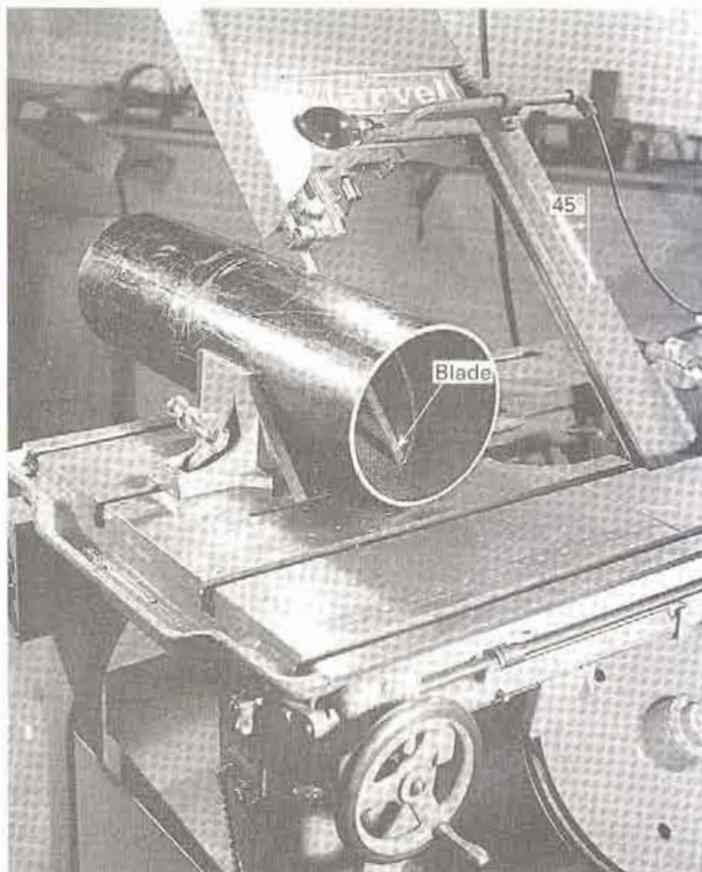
Vertical bandsaw cutting a piece of pipe, showing head tilted 45°.
